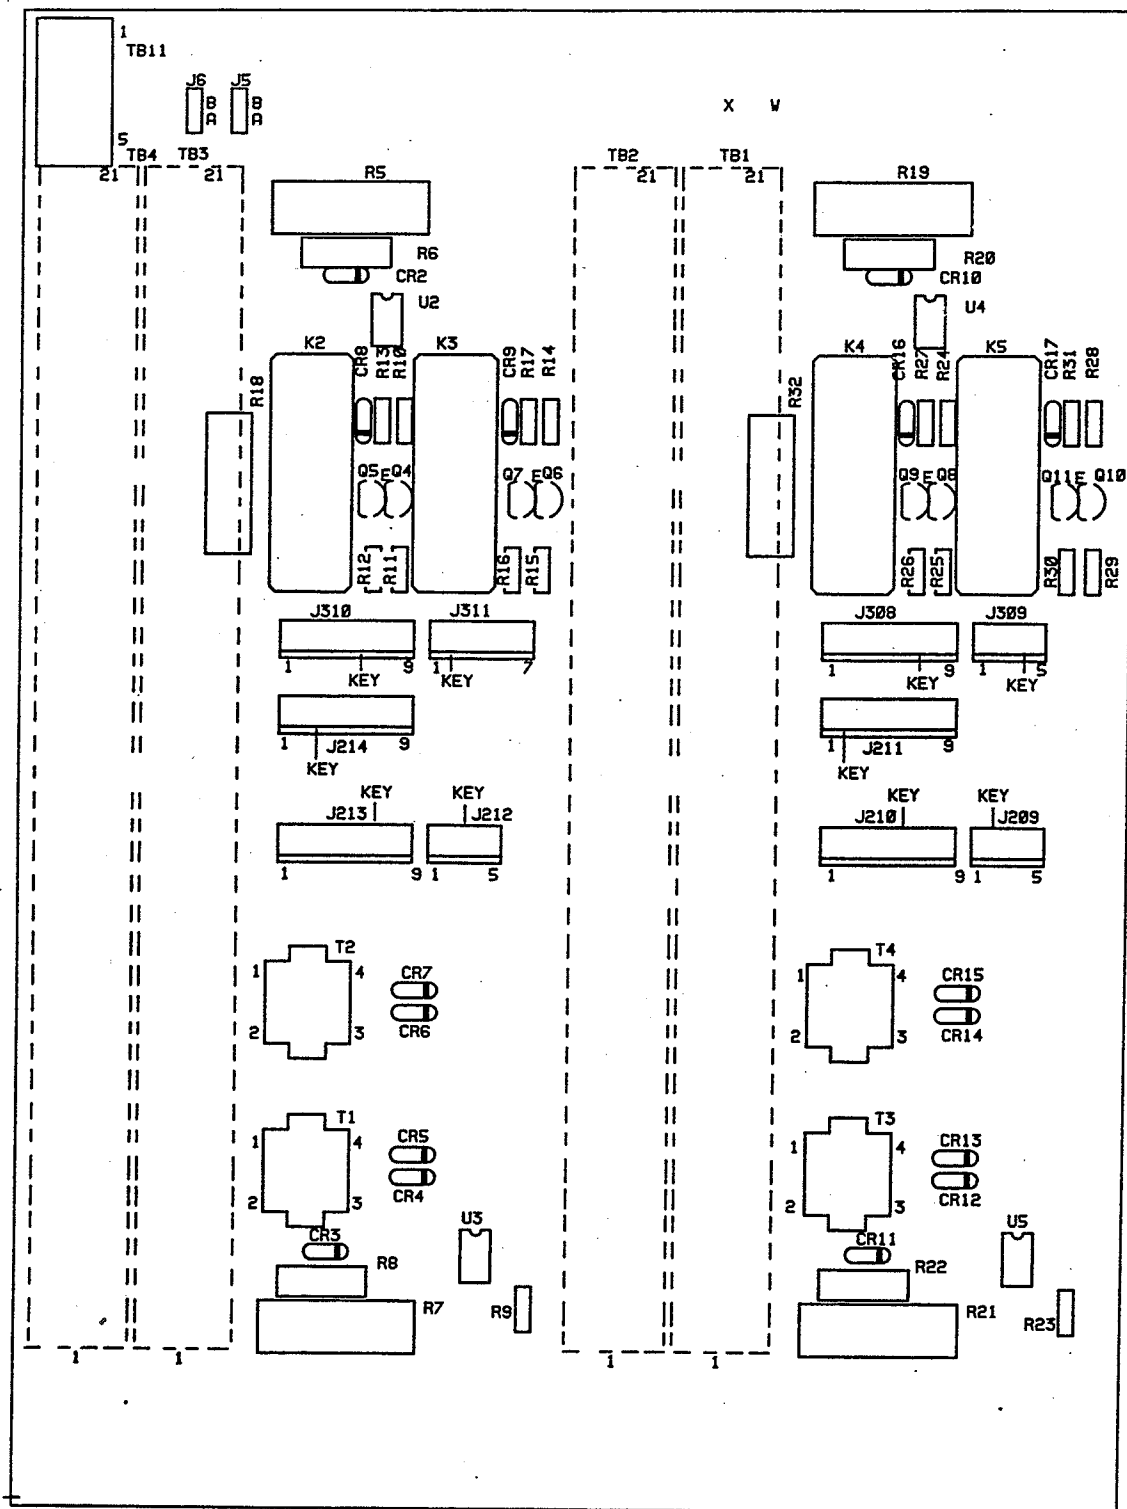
Component locator drawing, RFL 95 I/O INT Interface Module
